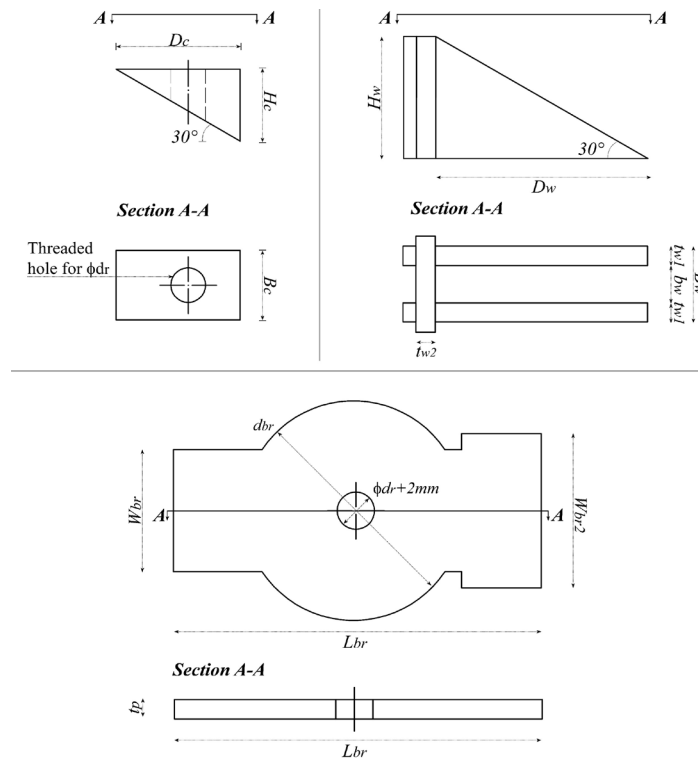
Components' detail (a) Top wedge, (b) bottom wedge and (c) bearing plate
